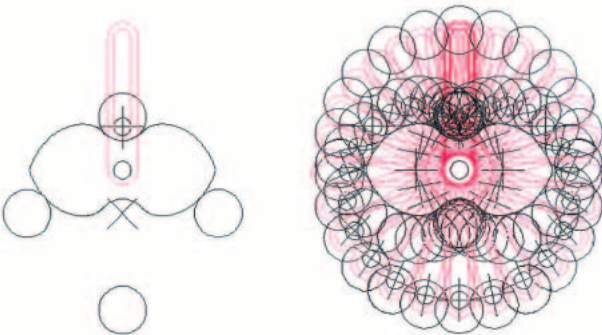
Full-turn cardioid indexer using two-tooth prolate epitrochoidal spur gearing elements of internal gear mesh type we have discussed in connection with Figure 1. The crank pin is fixed onto the roller follower wheel, with its center at a radius from the wheel center to satisfy both the prolate epitrochoid gear profile and the cardioid traced by the crank pin center, for a common center distance with the wheel, as a “congruity criterion” for proper design.
